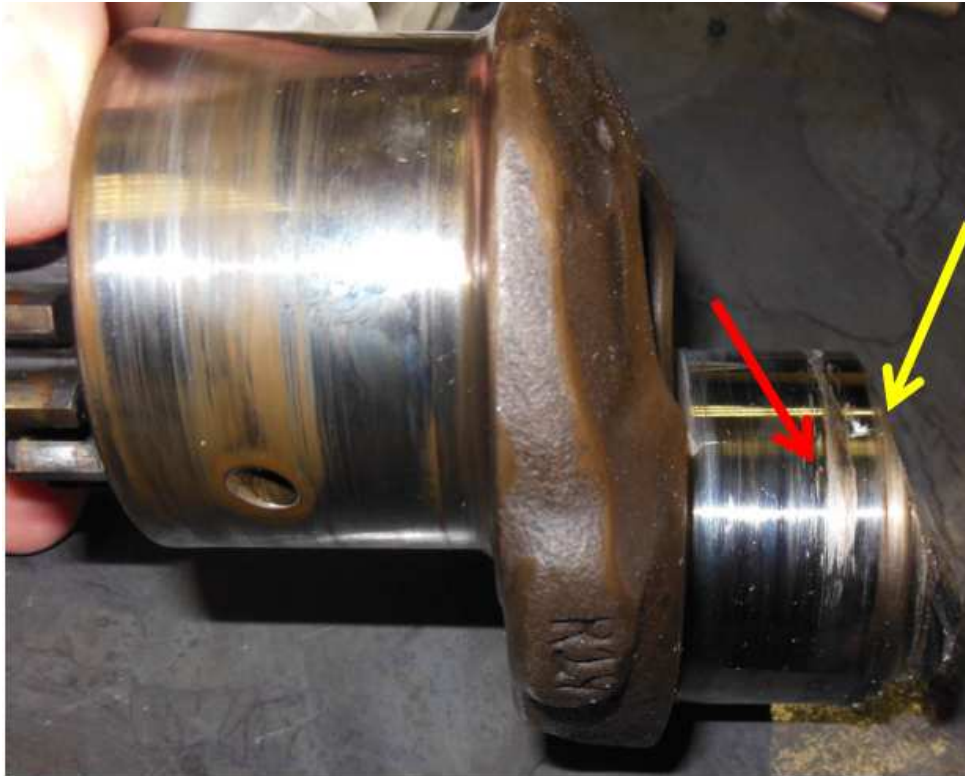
Typical Lycoming Crankshaft Assembly for 0-360 series engine
